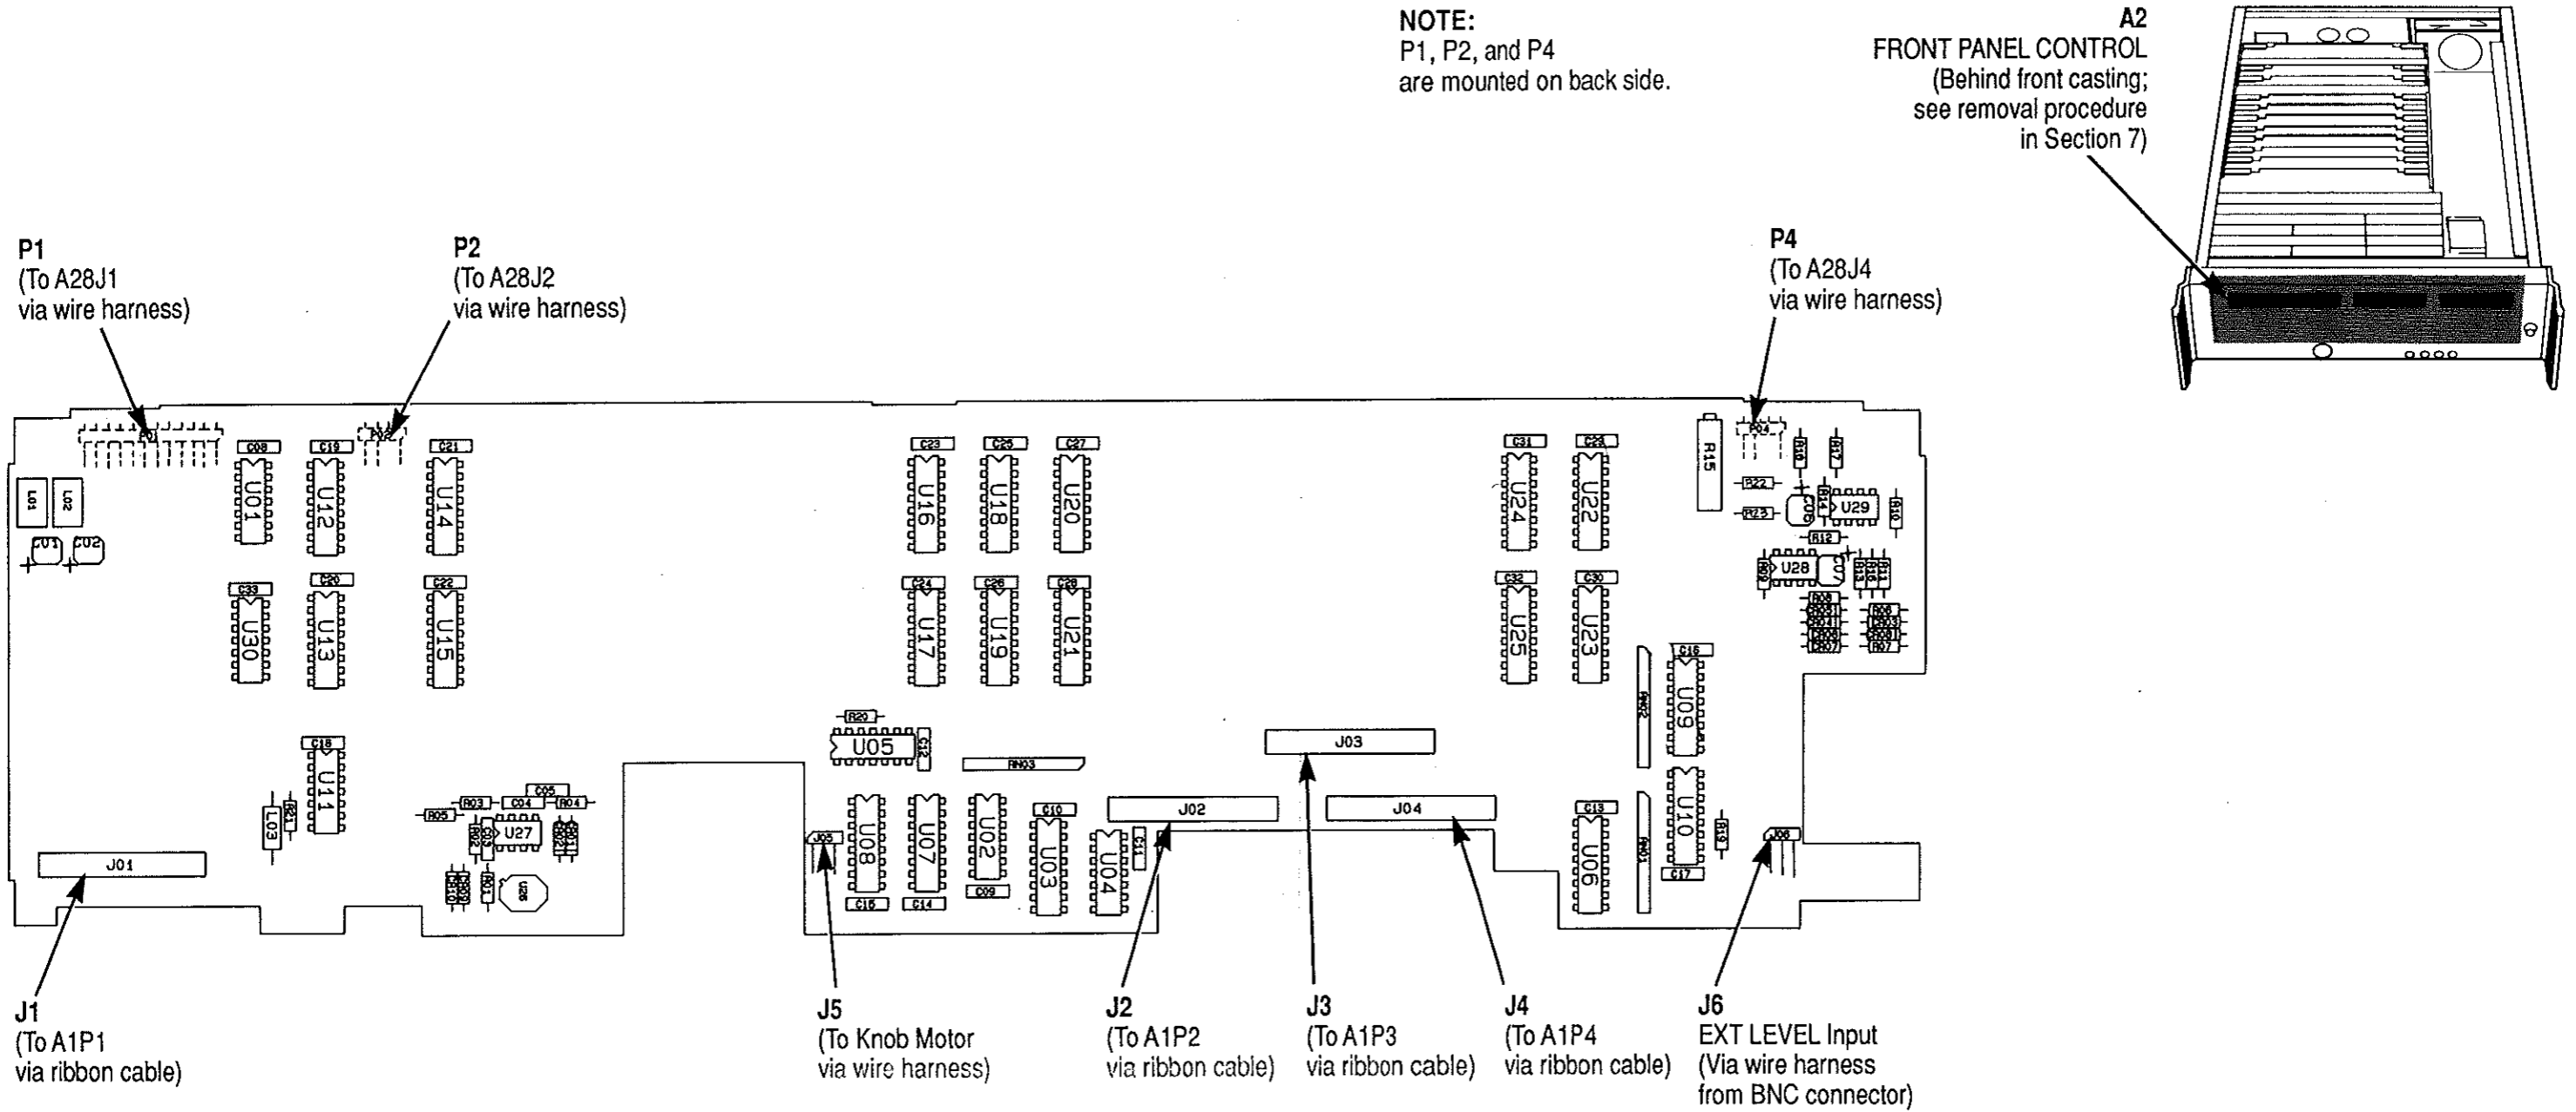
D-5. A2 Front Panel Control PCB Schematic Diagram (Sheet 2 of 3) 6700-D-31702-3 (Rev. G)
